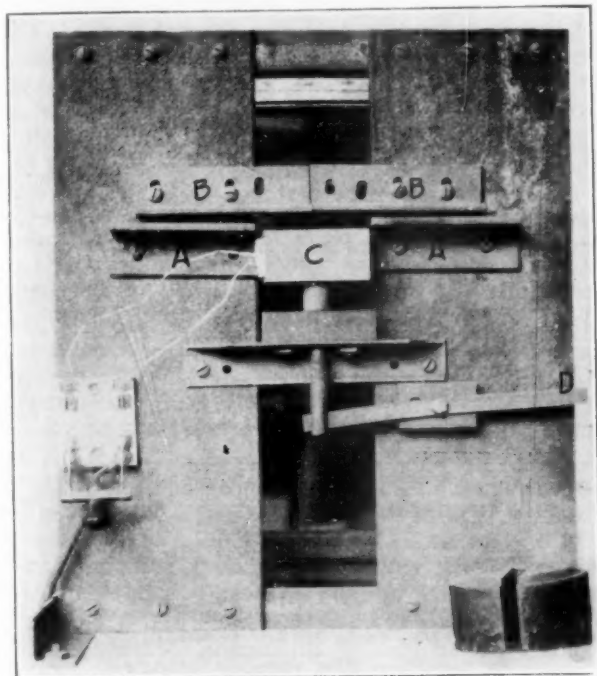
APPARATUS FOR SOLDERING TEST SPECIMENS
